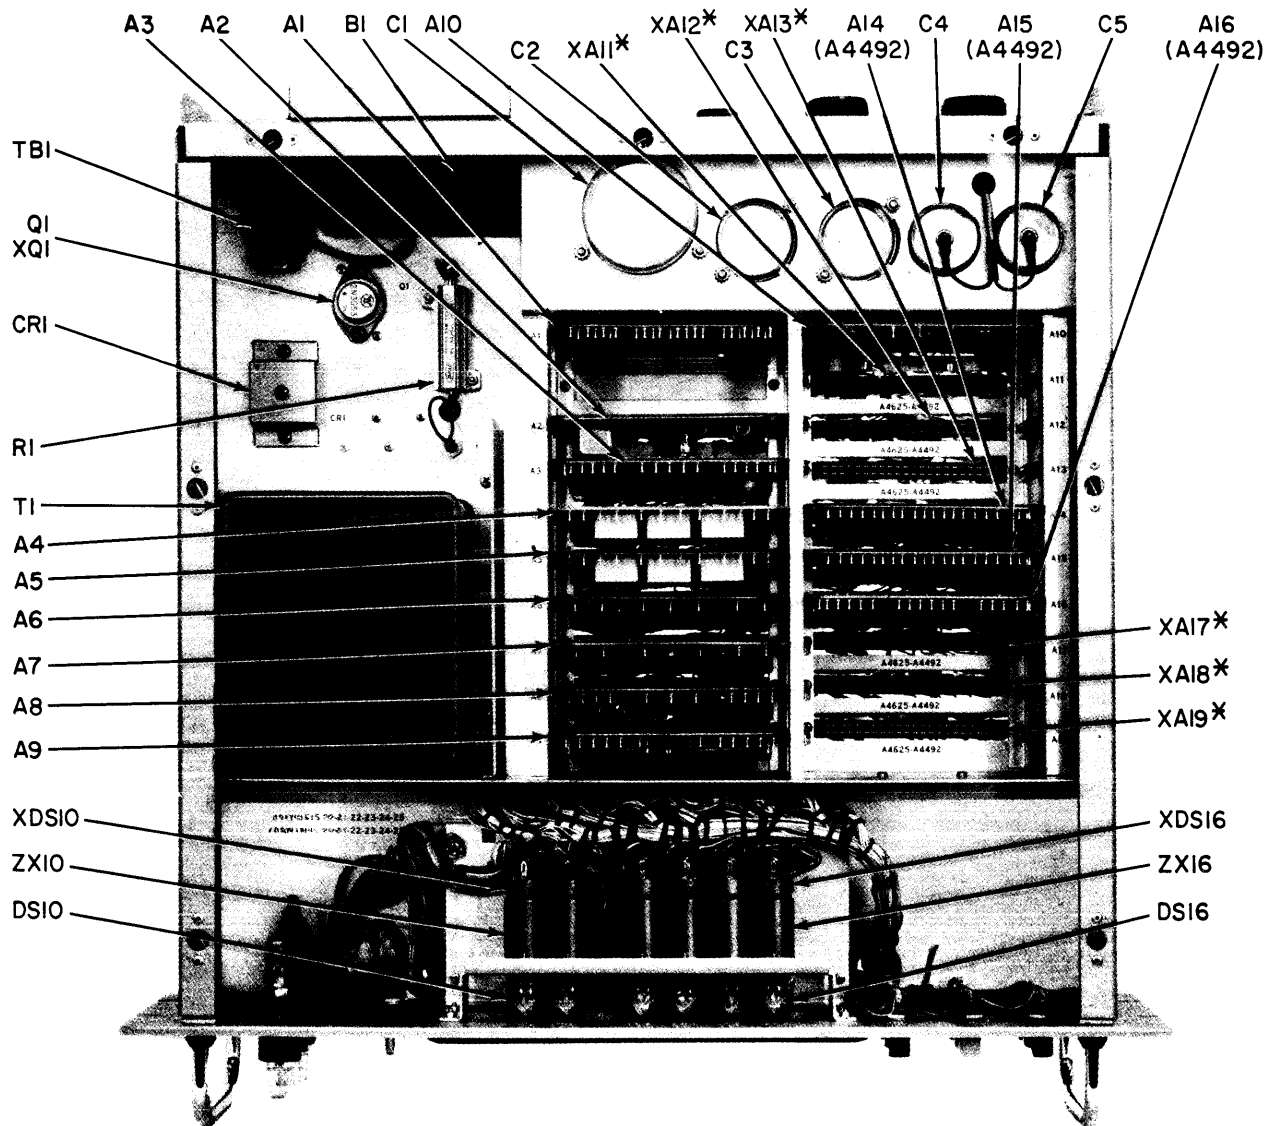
Component Locations, Bottom View of Readback Indicator, ID-1600/UR
